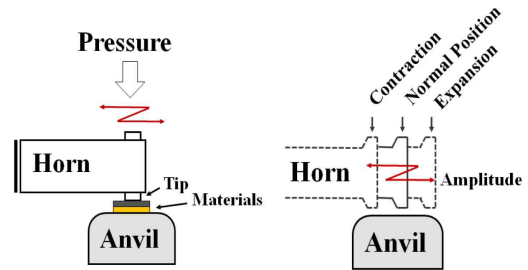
Schematic mechanism of the ultrasonic welding^[9]
